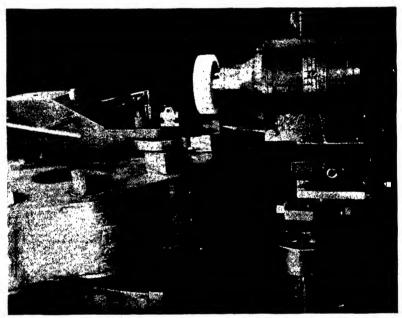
Special grinder setup to keep milling teeth sharp.
